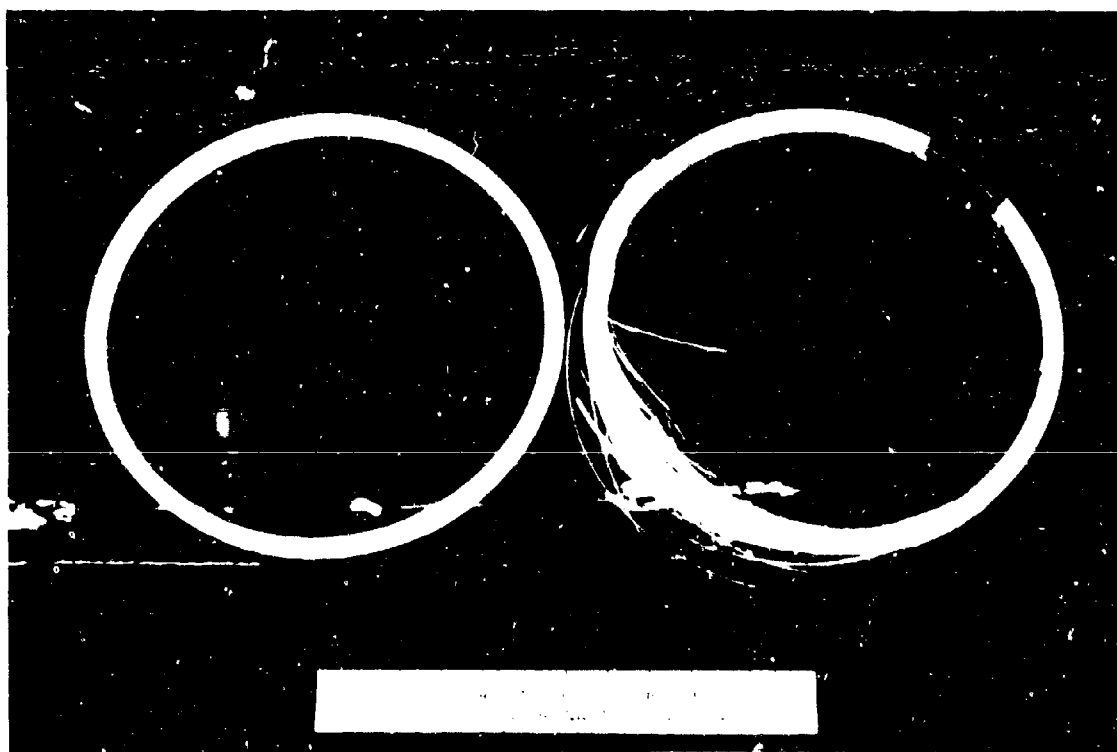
FULL SCALE BAND AND TYPICAL FAILURE IN TEST RING
